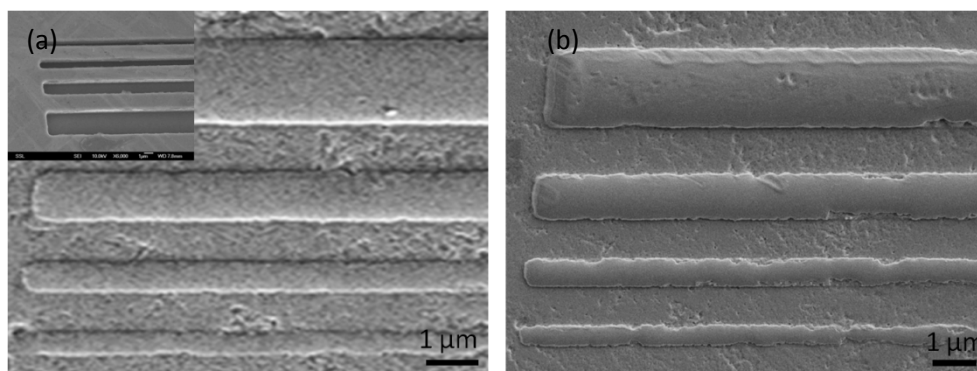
Injection molded structures with PC (a) injection speed: 600 mm/s, mold temp.: 80 °C; (b) injection speed: 600 mm/s, mold temp.: 100 °C (inserted figure is Ni mold).
